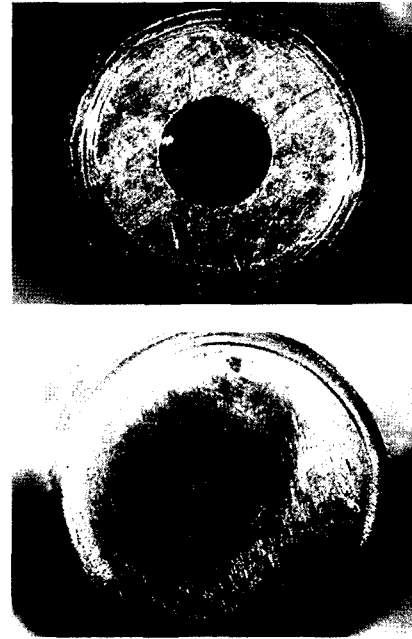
Appearance of contact tip front: a) as-received condition, b) after welding for 't' hour
